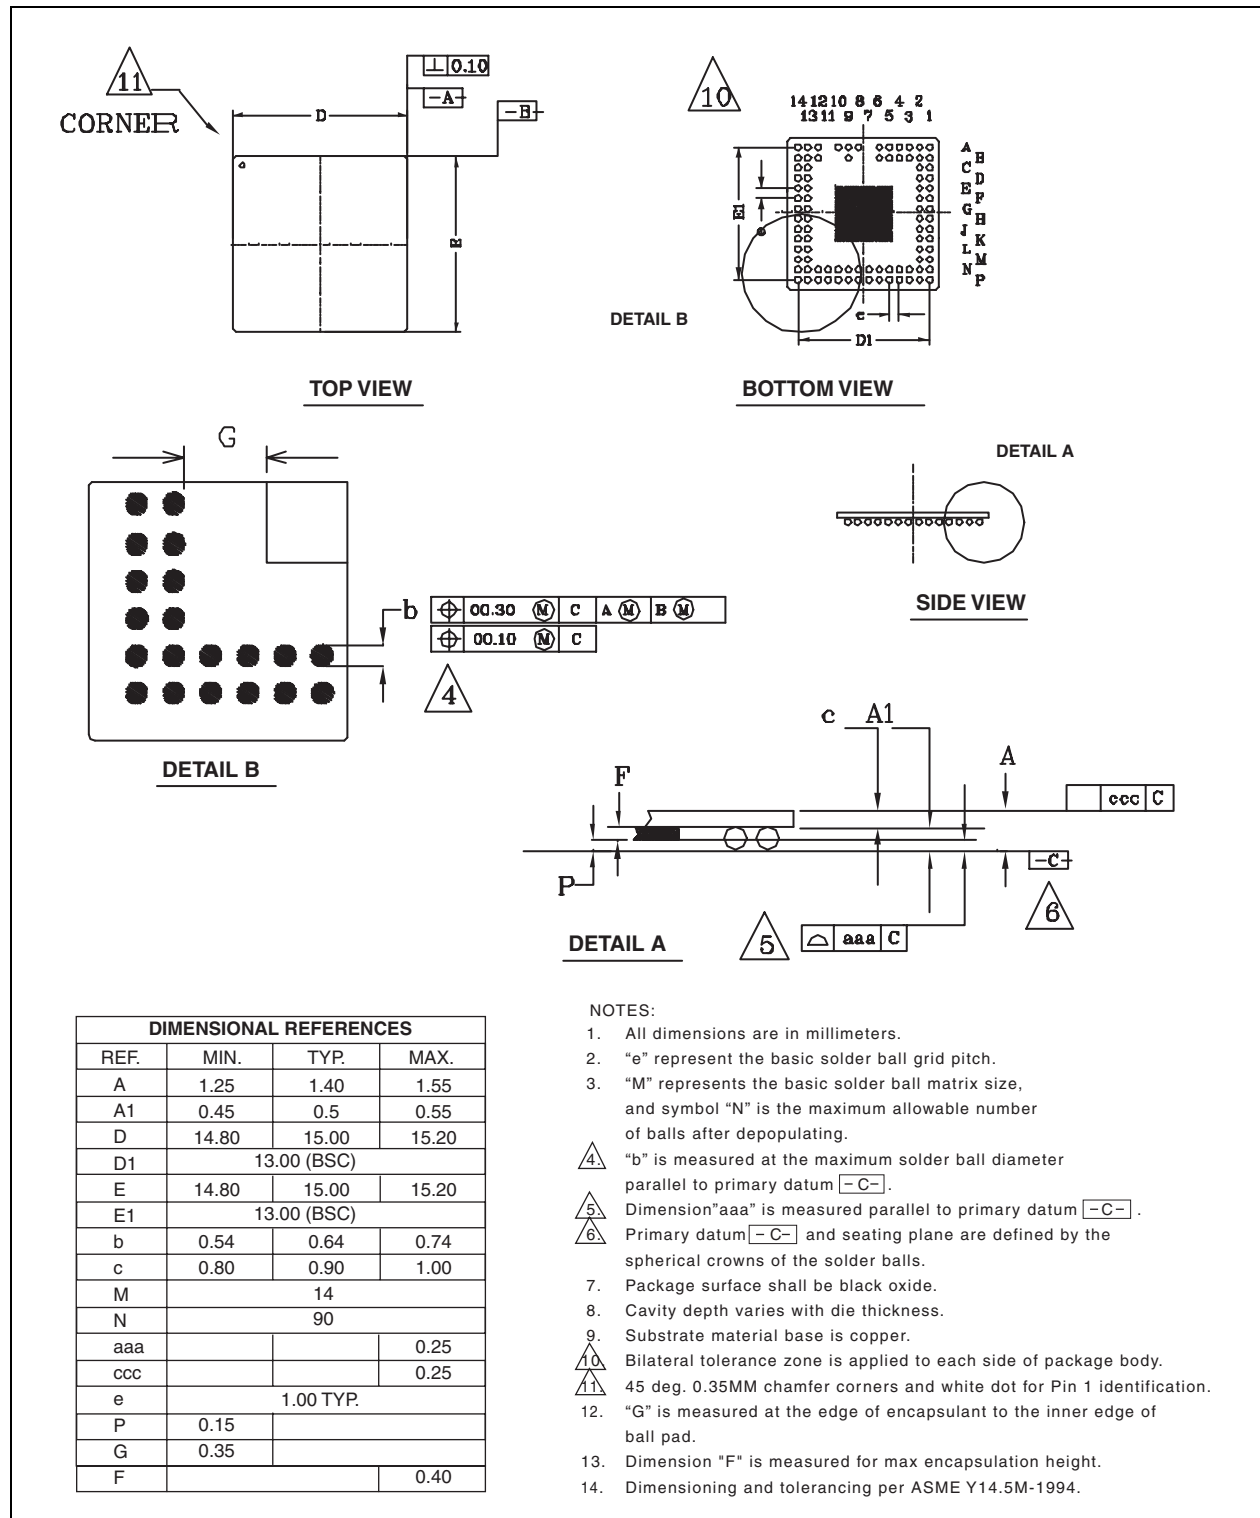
Package Drawing for 90-Ball TBGA (UT)
